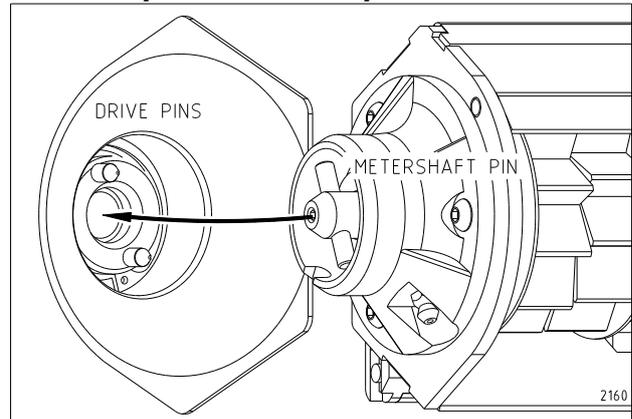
Ensure Drive pins & metershaft pin miss each other when engaging.
